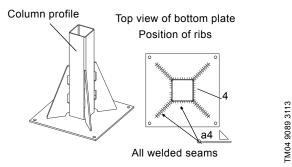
Welding the column profile on to the bottom fixation plate
